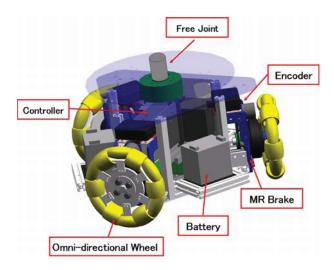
Components of Omni-directional Passive Mobile Robot Called PRP
